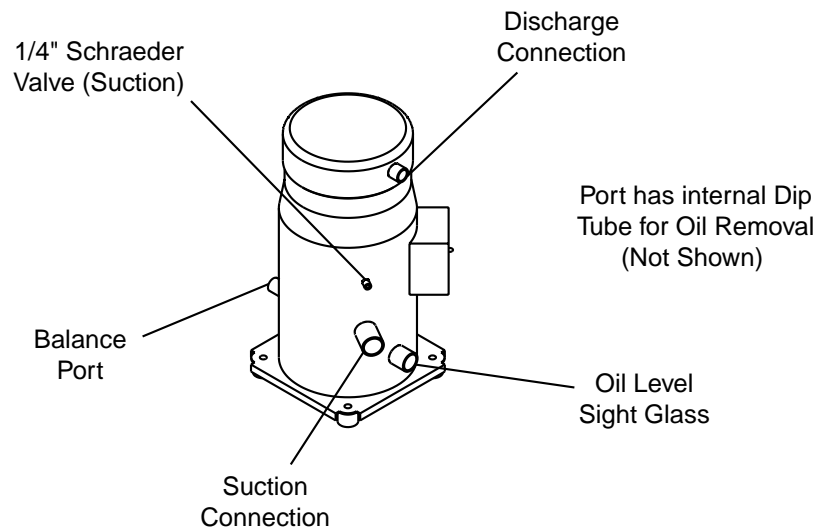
COMPRESSOR (REF. TABLE 6, PAGE 18)
